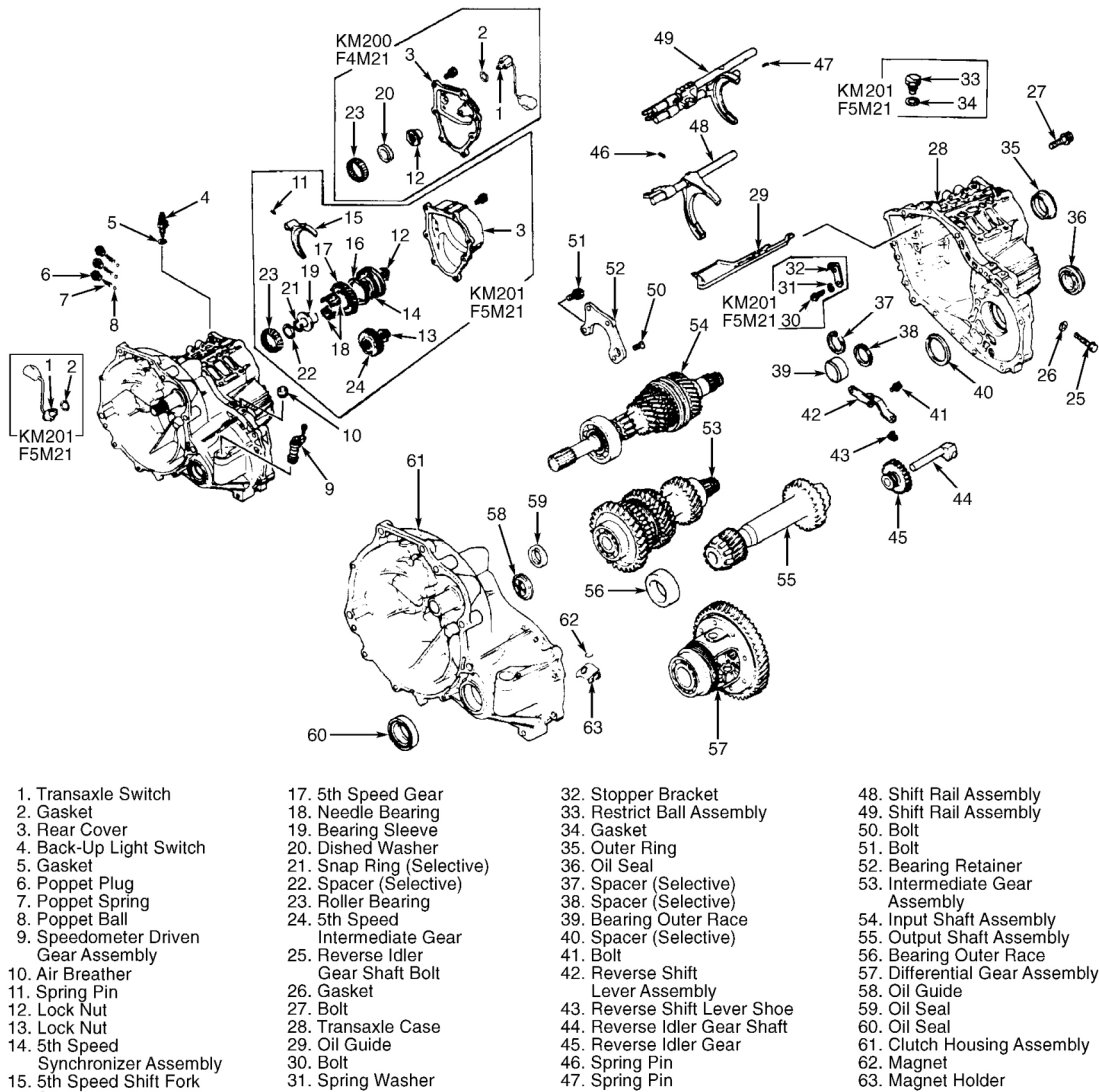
Exploded View Of Transaxle (KM200, KM201, F4M21 & F5M21)
